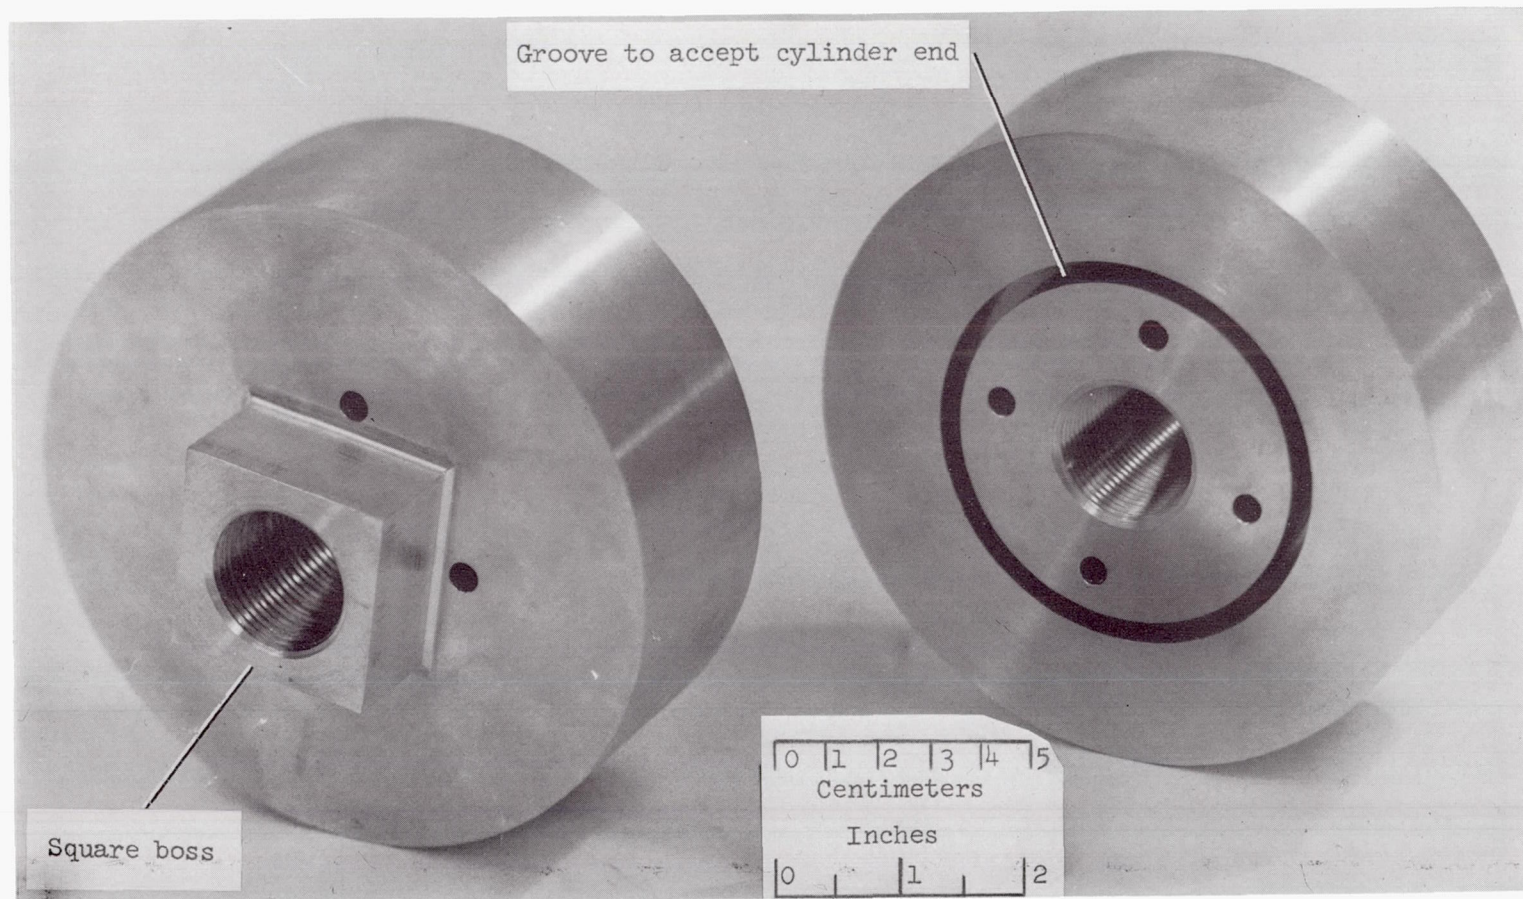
Fixtures for tension and torsion testing of cylinders.
